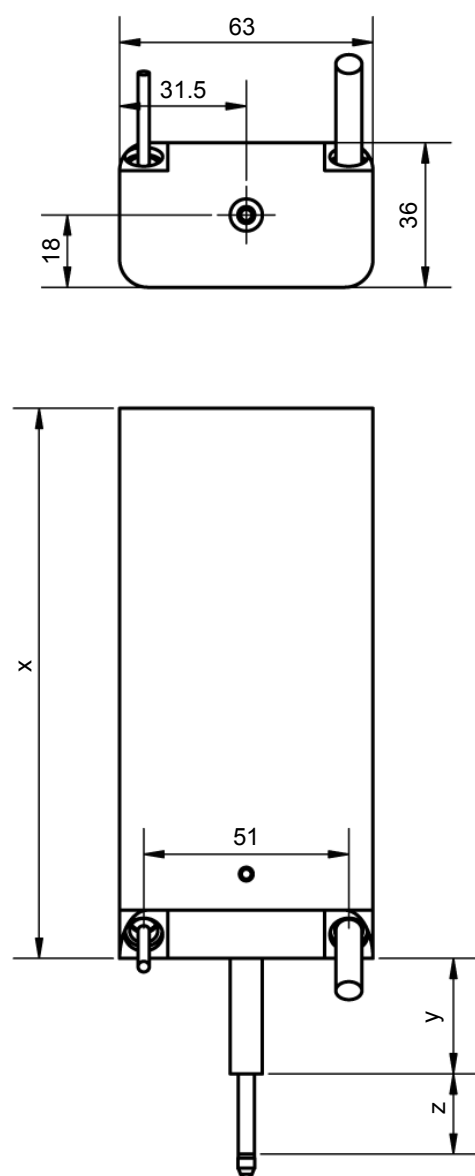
Dimensional drawing of the sensor head (gauging probe)
